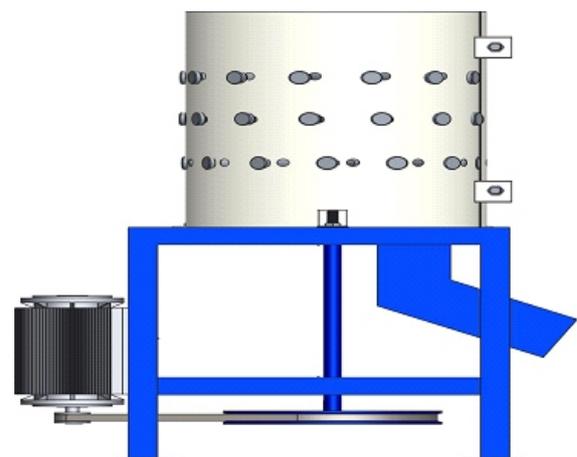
A diagram showing the assembled adjustable de-feathering machine
